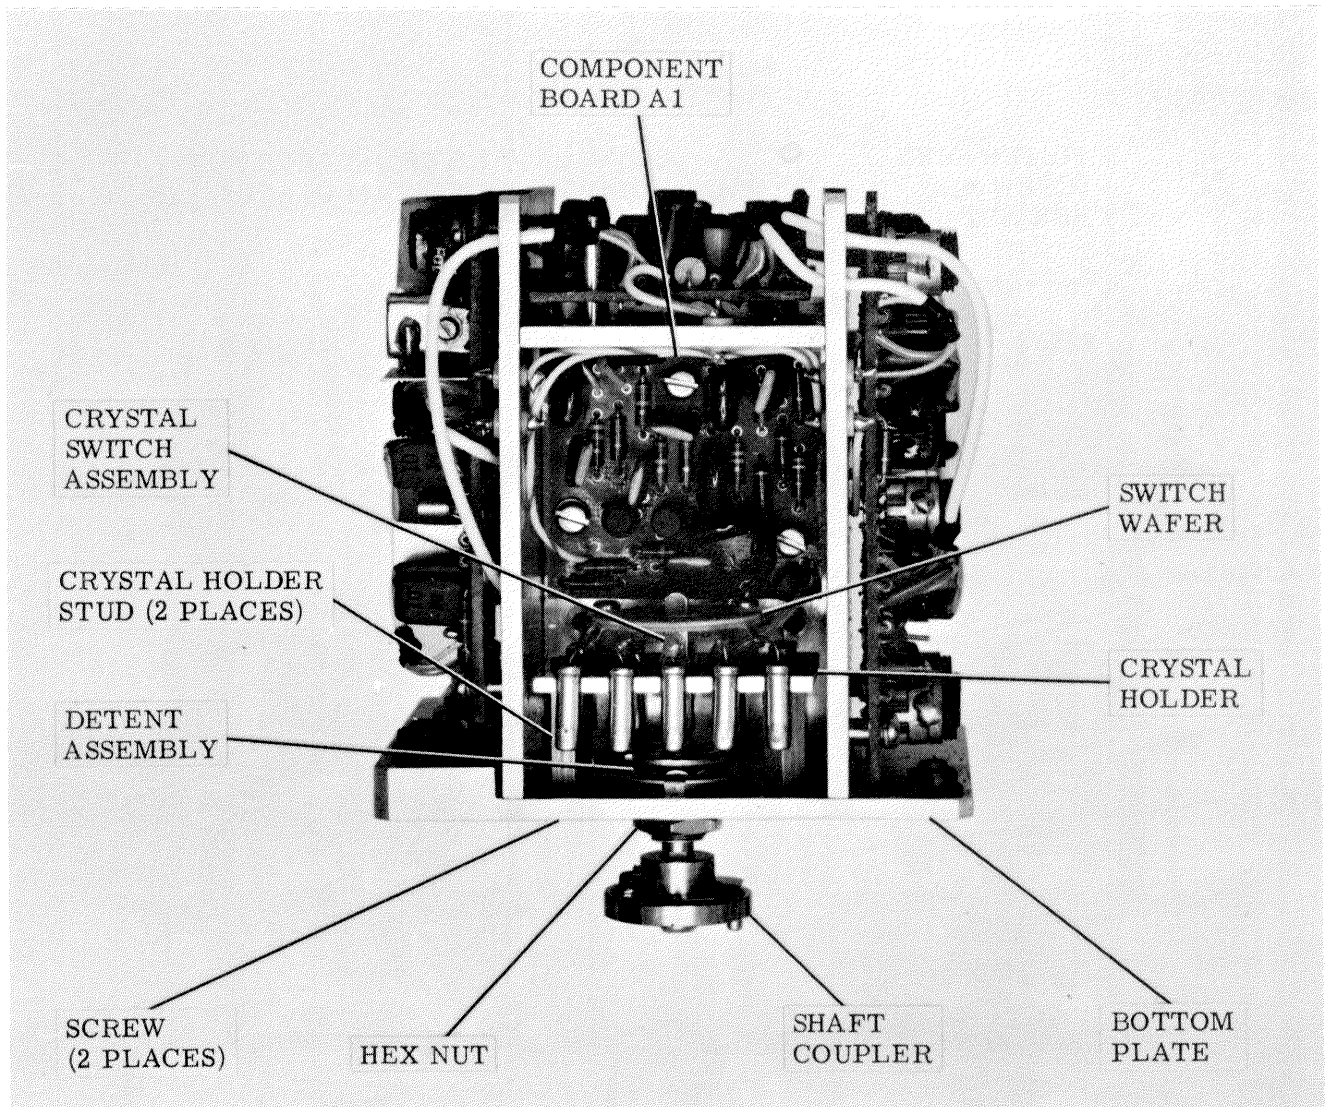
100KC Synthesizer Electronic Subassembly, Component Location
